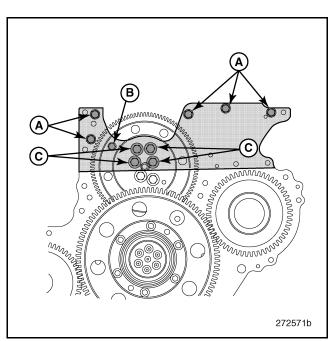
Cylinder Head-to-Timing Gear Plate Screw Locations
